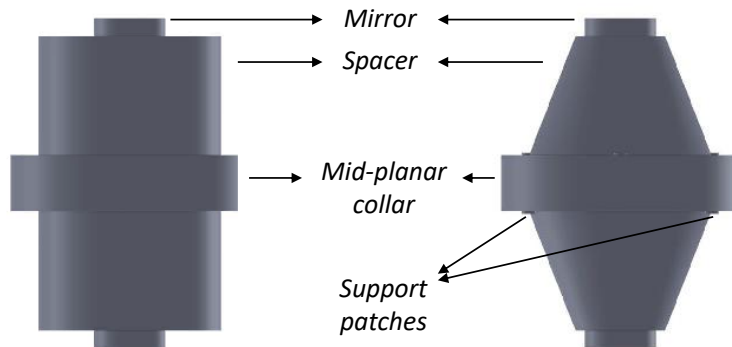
Cylinder and tapered cylinder spacers of similar dimensions with collars.
